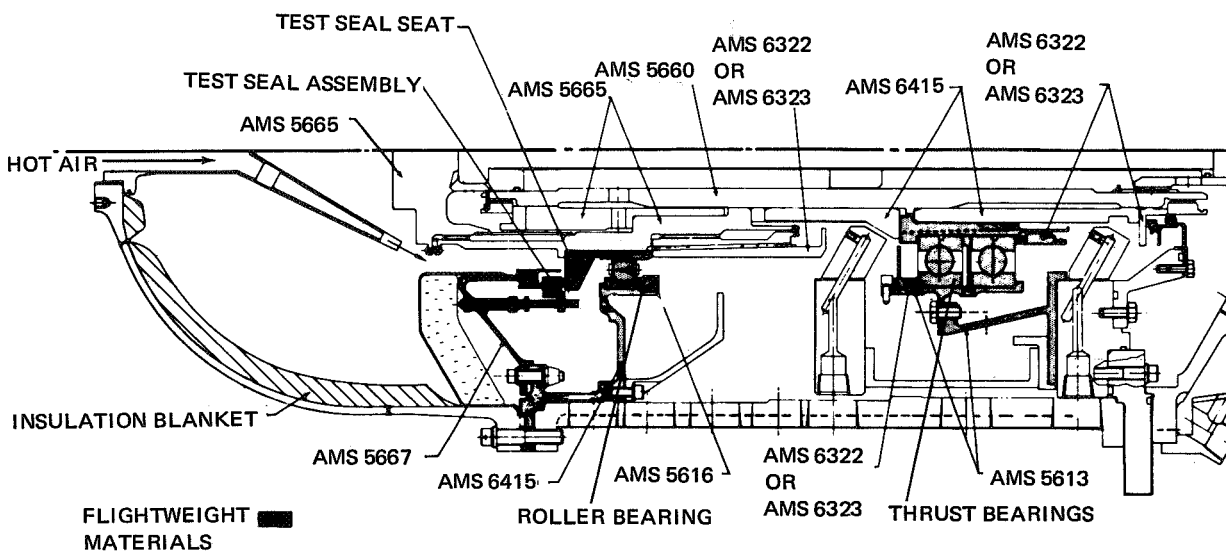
Rig Layout Showing Test Seal Location and Materials Used
